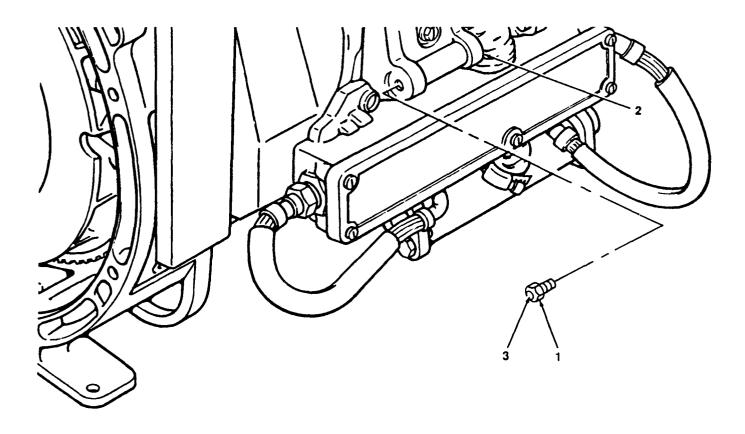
Relief Valve, Removal Inspection and Installation.
